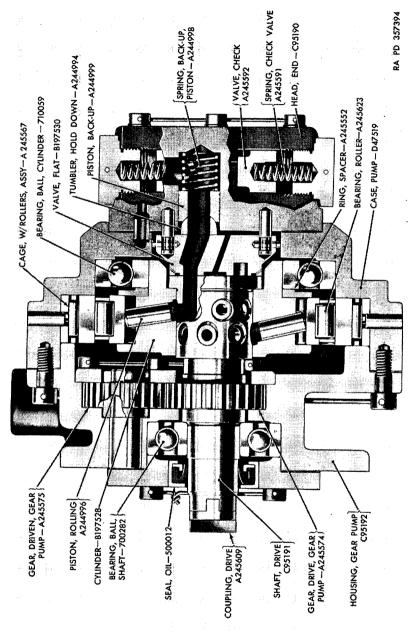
Side elevation cross section of variable-delivery hydraulic pump.
